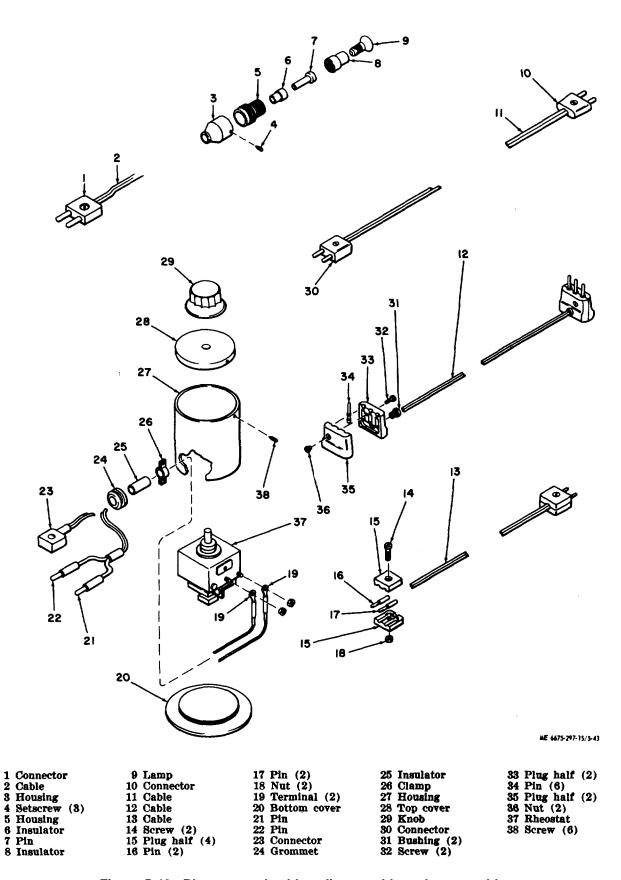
Rheostat and cables, disassembly and reassembly.
